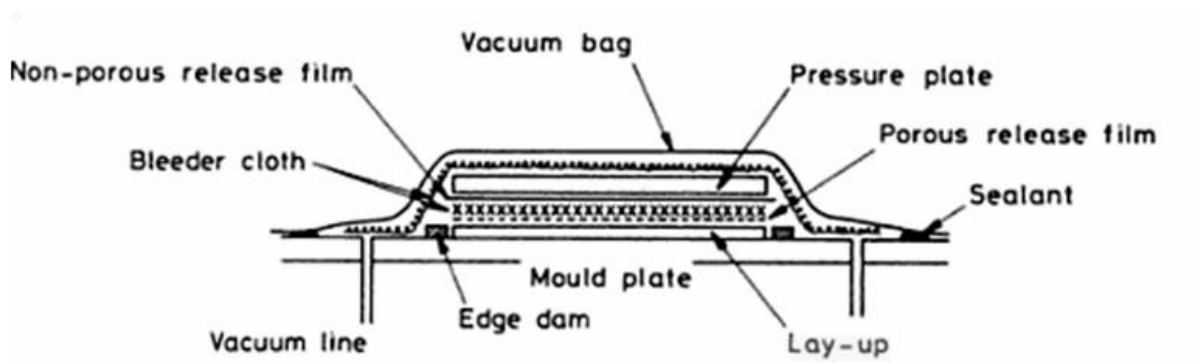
Wet lay-up manufacturing technique [38]
